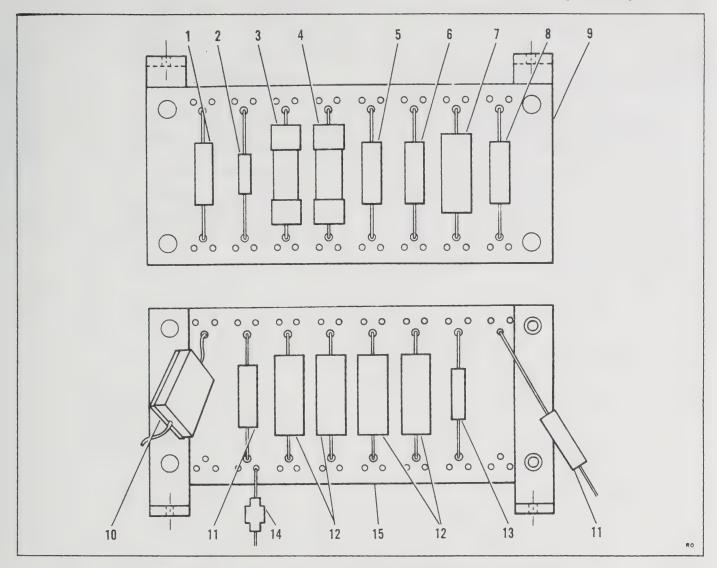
Printed Circuit Board Assembly, Part No. 400D-75G
